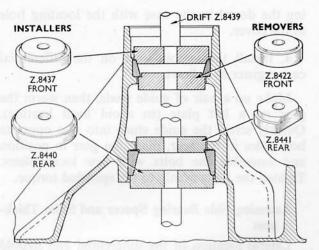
Application of service tools for removal and installation of pinion bearing outer races
